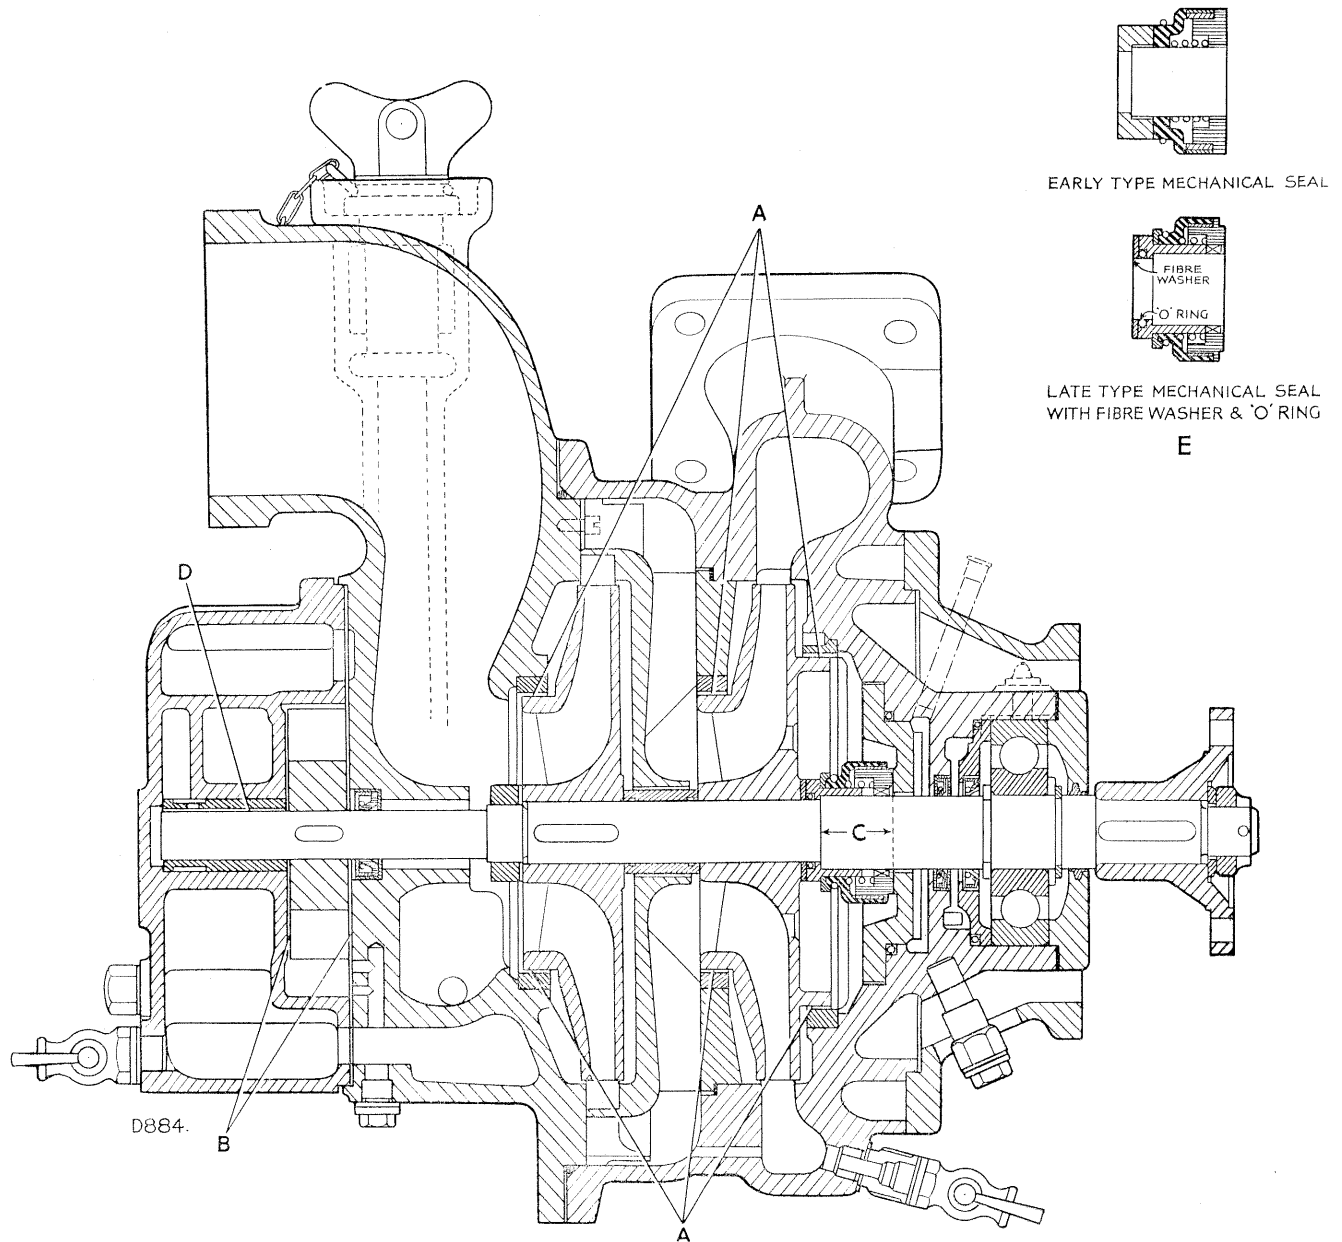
Sectioned view of pump, Serial No. A745060 onwards
